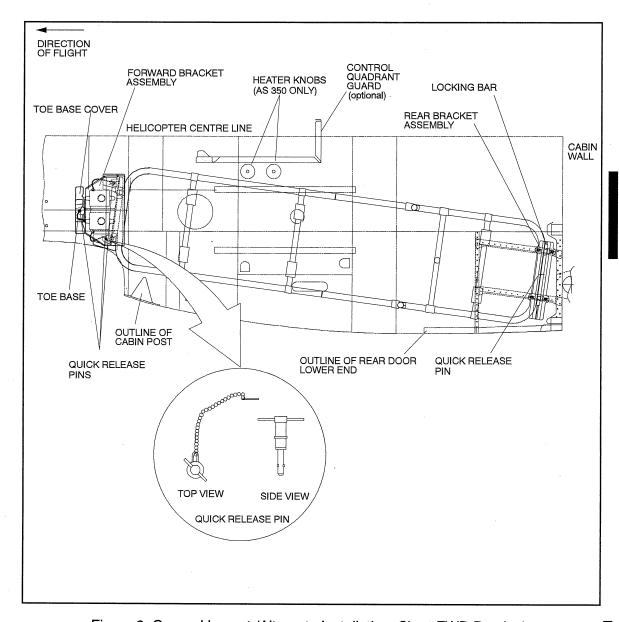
General Layout (Alternate Installation, Short FWD Bracket)
